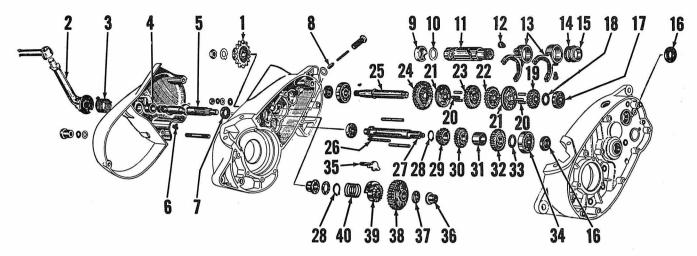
Exploded view of transmission assembly. Shift forks (13) are interchangable,
